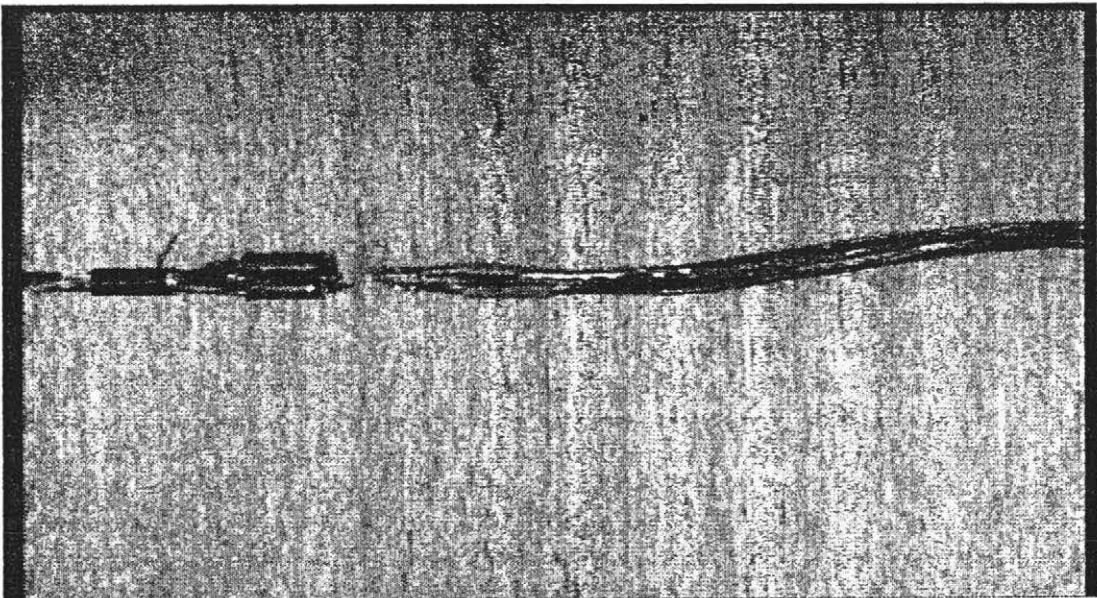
, Failure of the wire strands of a crimped connection, by the complete pull out of the wires from the ferule (predominant in higher cross-sectional joints)
